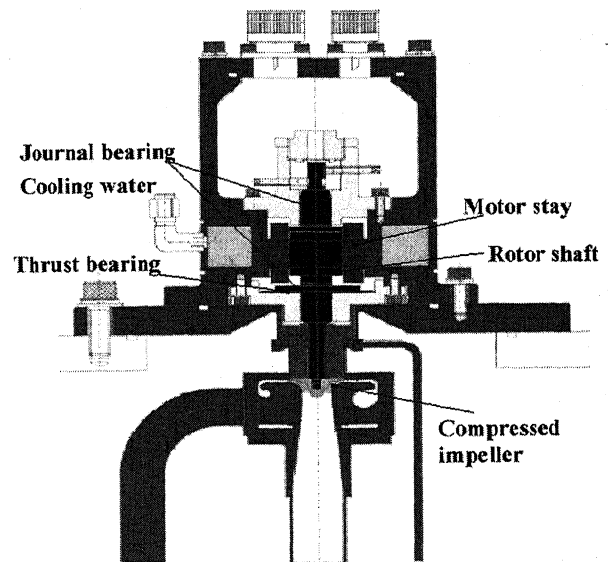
The cross-sectional drawing of the cryogenic compressor installed sub-cooled helium test facility.
